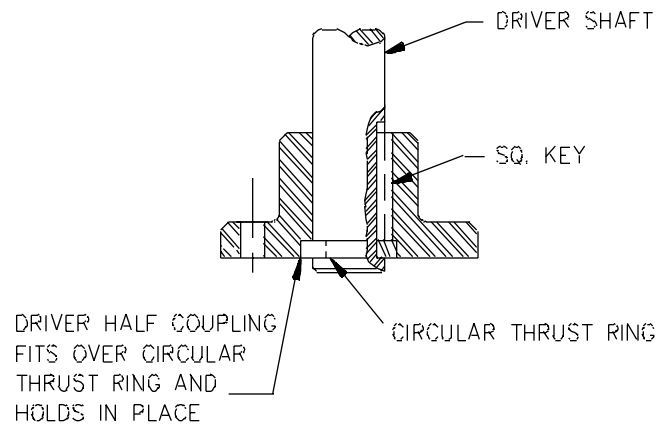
Driver Half-Coupling Correctly Positioned
